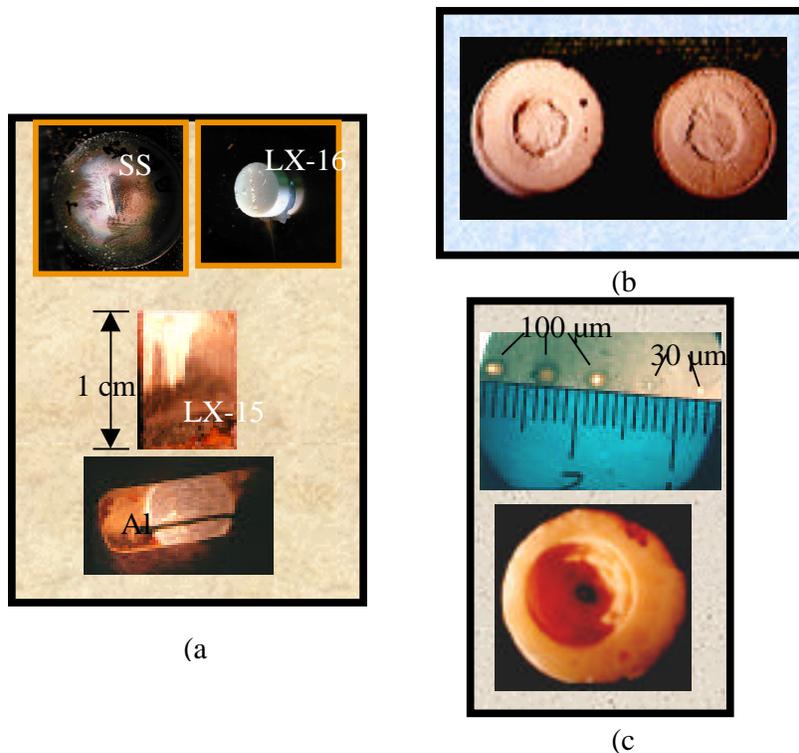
a) Top: laser cut through 1.2 mm of stainless steel and 2 mm of LX-16. Bottom: cut through 1 cm of LX-15 and .5 mm of Aluminum. b) Sectioned hemispherical detonator consisting of an Al shell, PBX-9407 and a PETN center. c) Top: Several holes drilled through PBX-9407 and bottom: a 3mm-diameter cavity machined in TNT.
